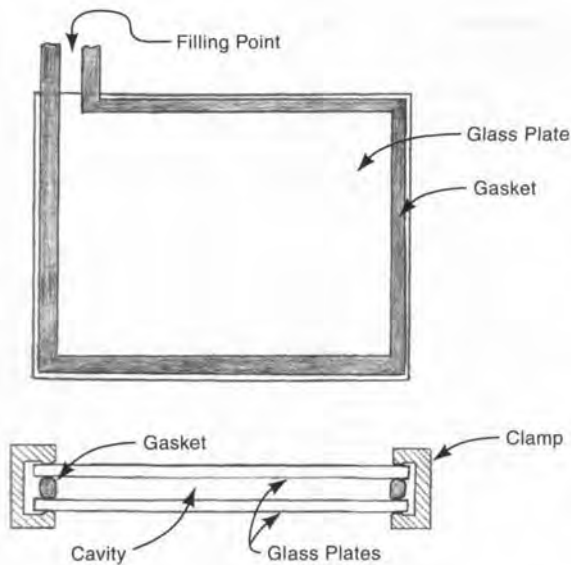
H1a Apparatus for cell casting of acrylic sheet.
